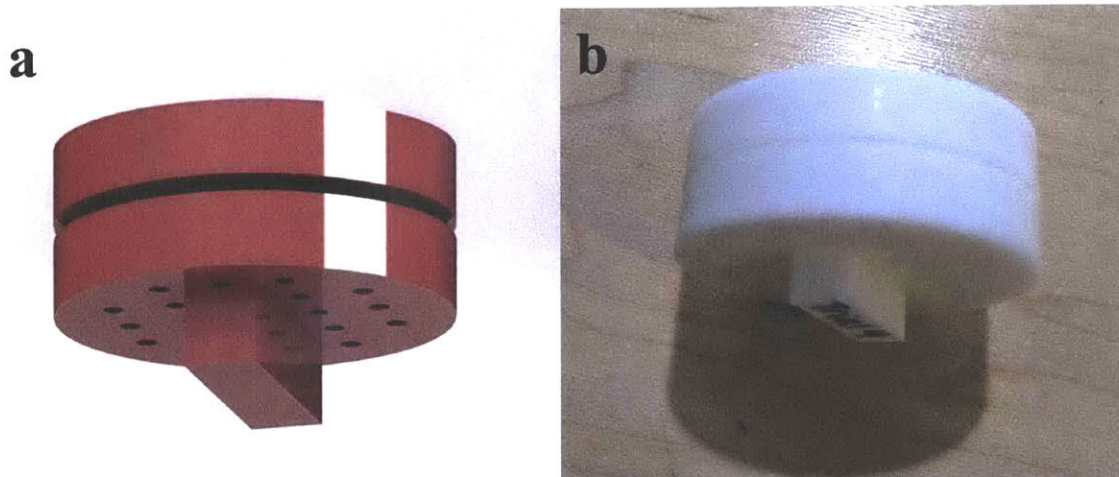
The a) rendering of the coupled assembly and b) 3D printed coupled assembly.
